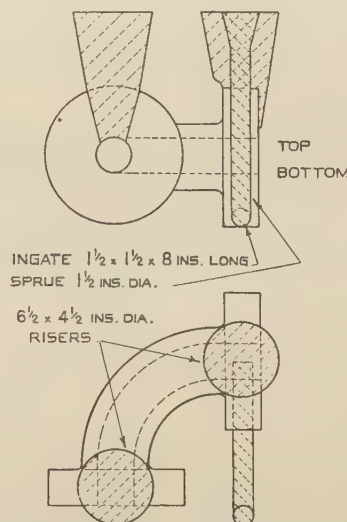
Casting and Feeding Arrangements for 3-in. Bend.
